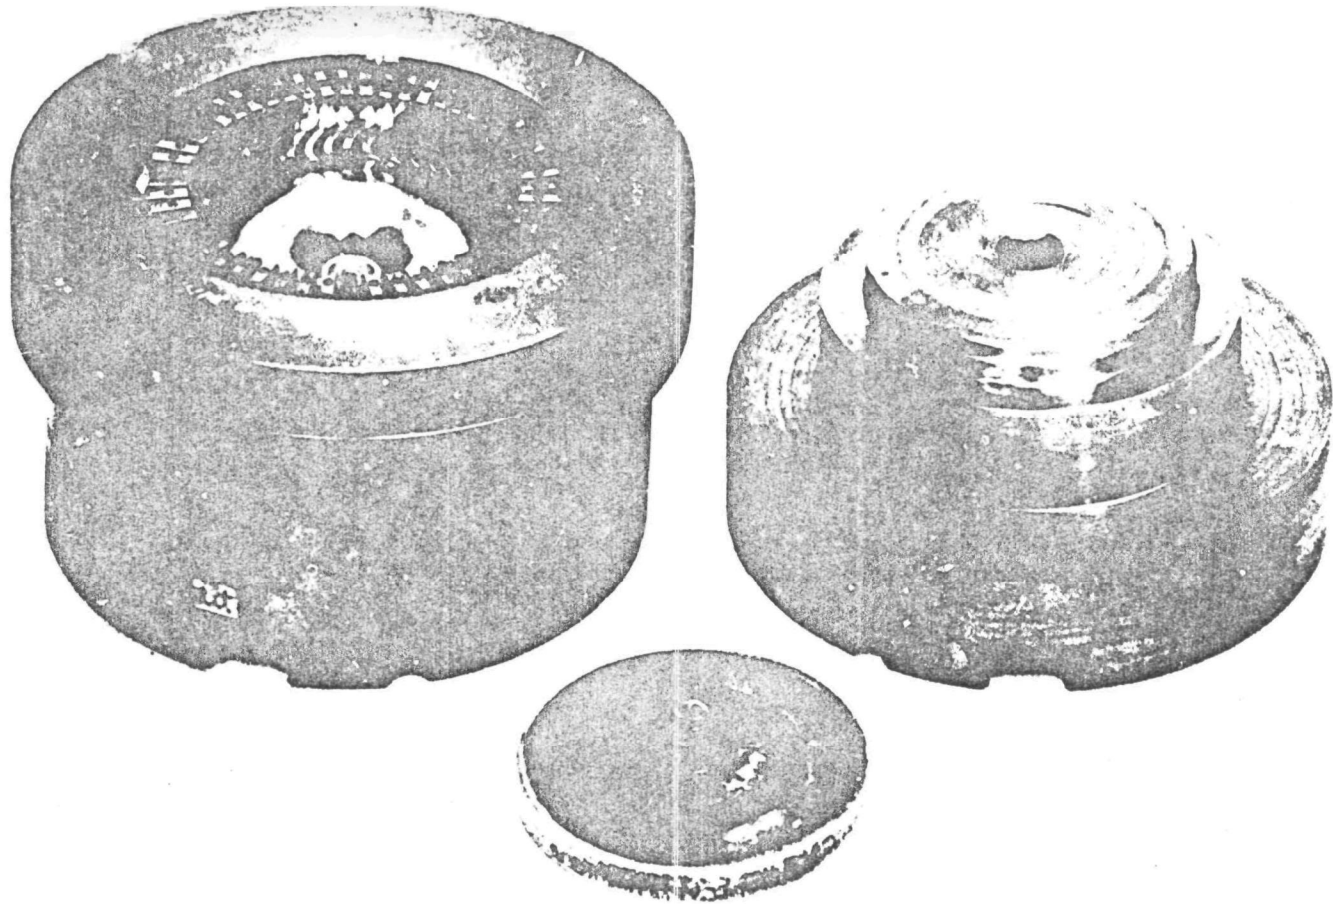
Finish Machined Bladed Rotor Tooling and Preform
